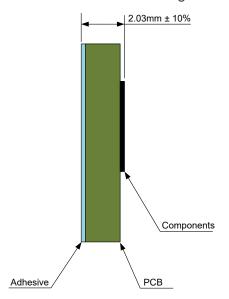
Stack-Up (A) - Thickness. PCB + 3M Double Sided Adhesive.
